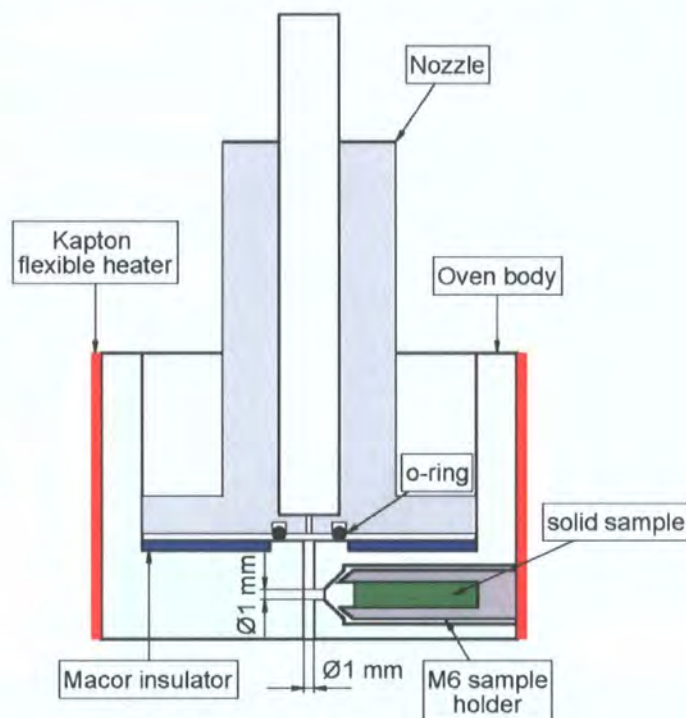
Cross section of the sample oven, showing the oven, sample holder (M6 screw), macor insulator, heater and o-ring sealing the oven to the nozzle.
